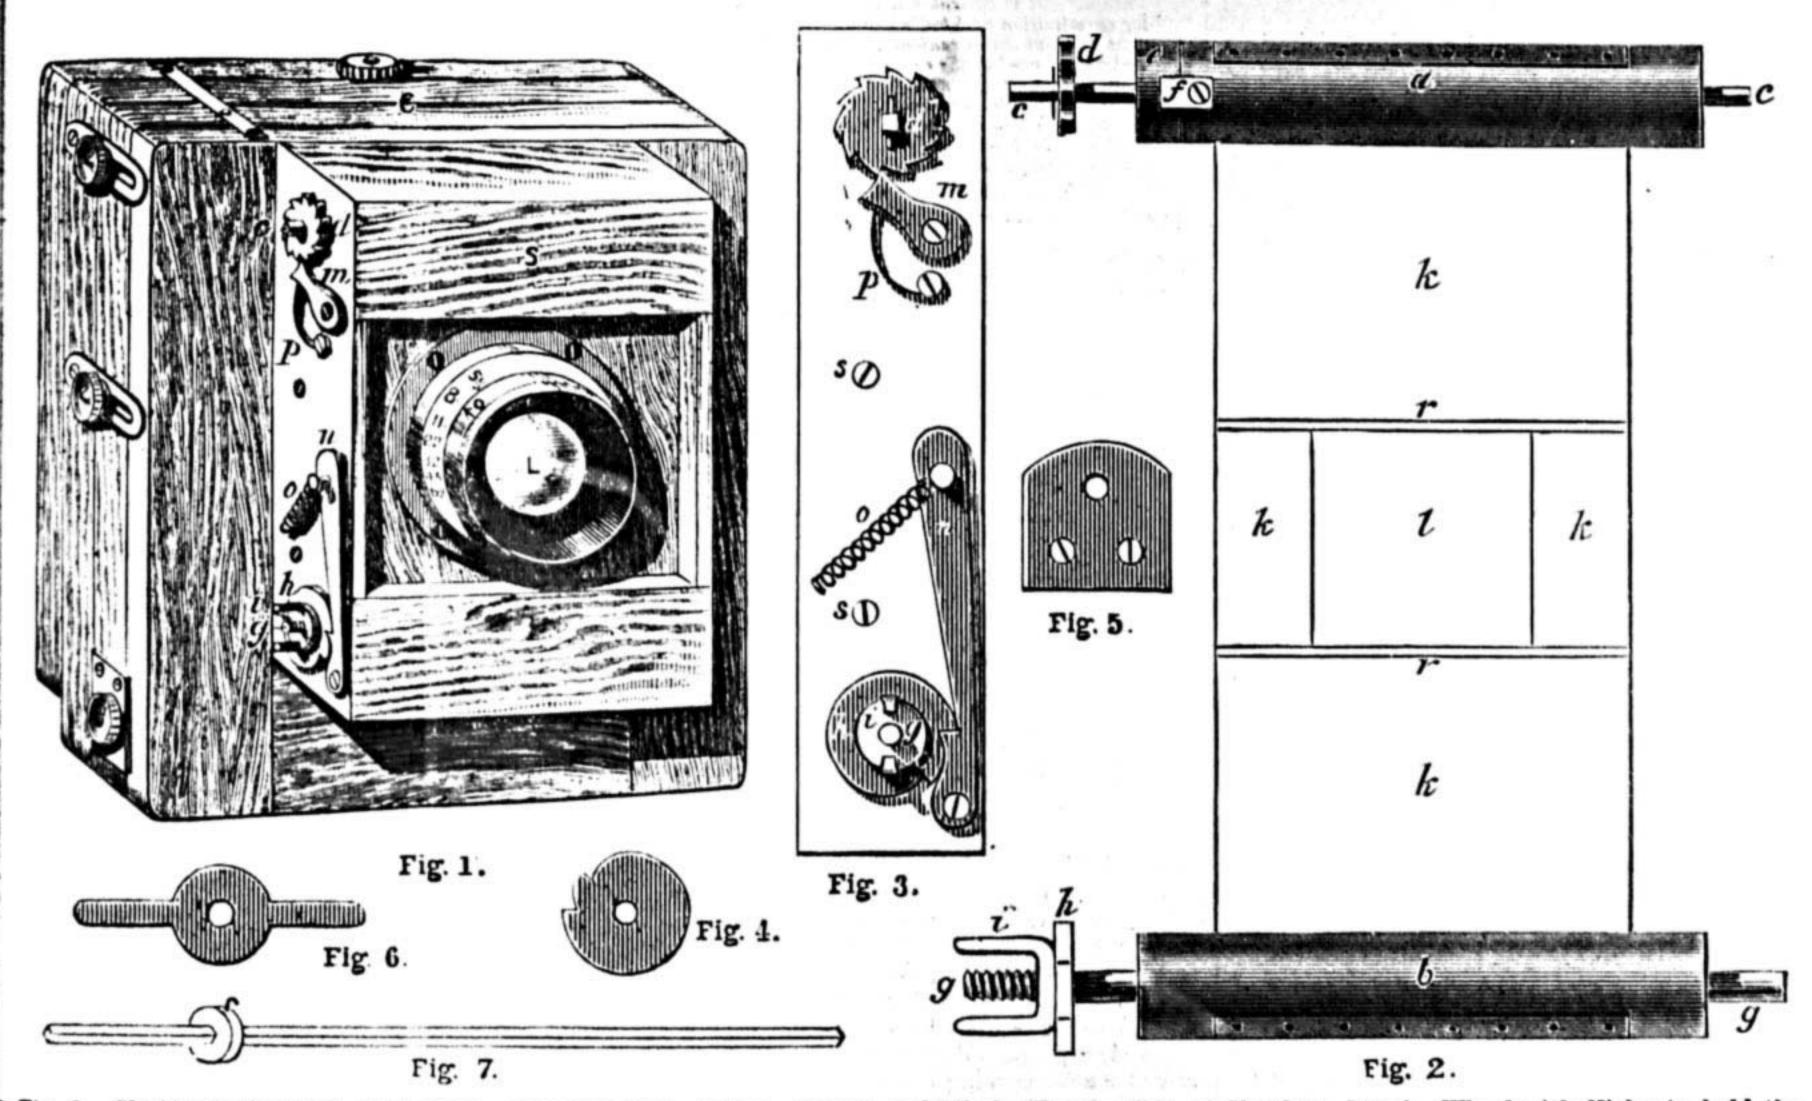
Shutter in Position on Camera, carrying Lens. Fig. 2.-Roller and Blind. Fig. 3.-Side of Shutter. Fg. 4.-Wheel with Nicks to hold the Blind down. Fig. 5. Plate to carry Spindle. Fig. 6.-Shape of Brass for making Winged Nut. Fig. 7. -Spindle, showing Arbor and Hook. References to Letters in all Figs. -C, Camera ; S, Shutter ; L, Lens ; a, Top Roller ; b, Bottom Roller ; c, Top Spindle ; d, Ratchet Wheel ; e, Barrel containing Spring; f, Pieces to fasten Barrel to Roller; g, Bottom Spindle; h, Wheel with Nicks; i, Winged Nut; k, Blind; l, Opening in Blind for exposure ; m, Catch to hold Ratchet ; n, Trigger ; o, Spring of Catch ; r, Thin Splines of Wood ; . Screws to fasten the Wood carrying the Long.
